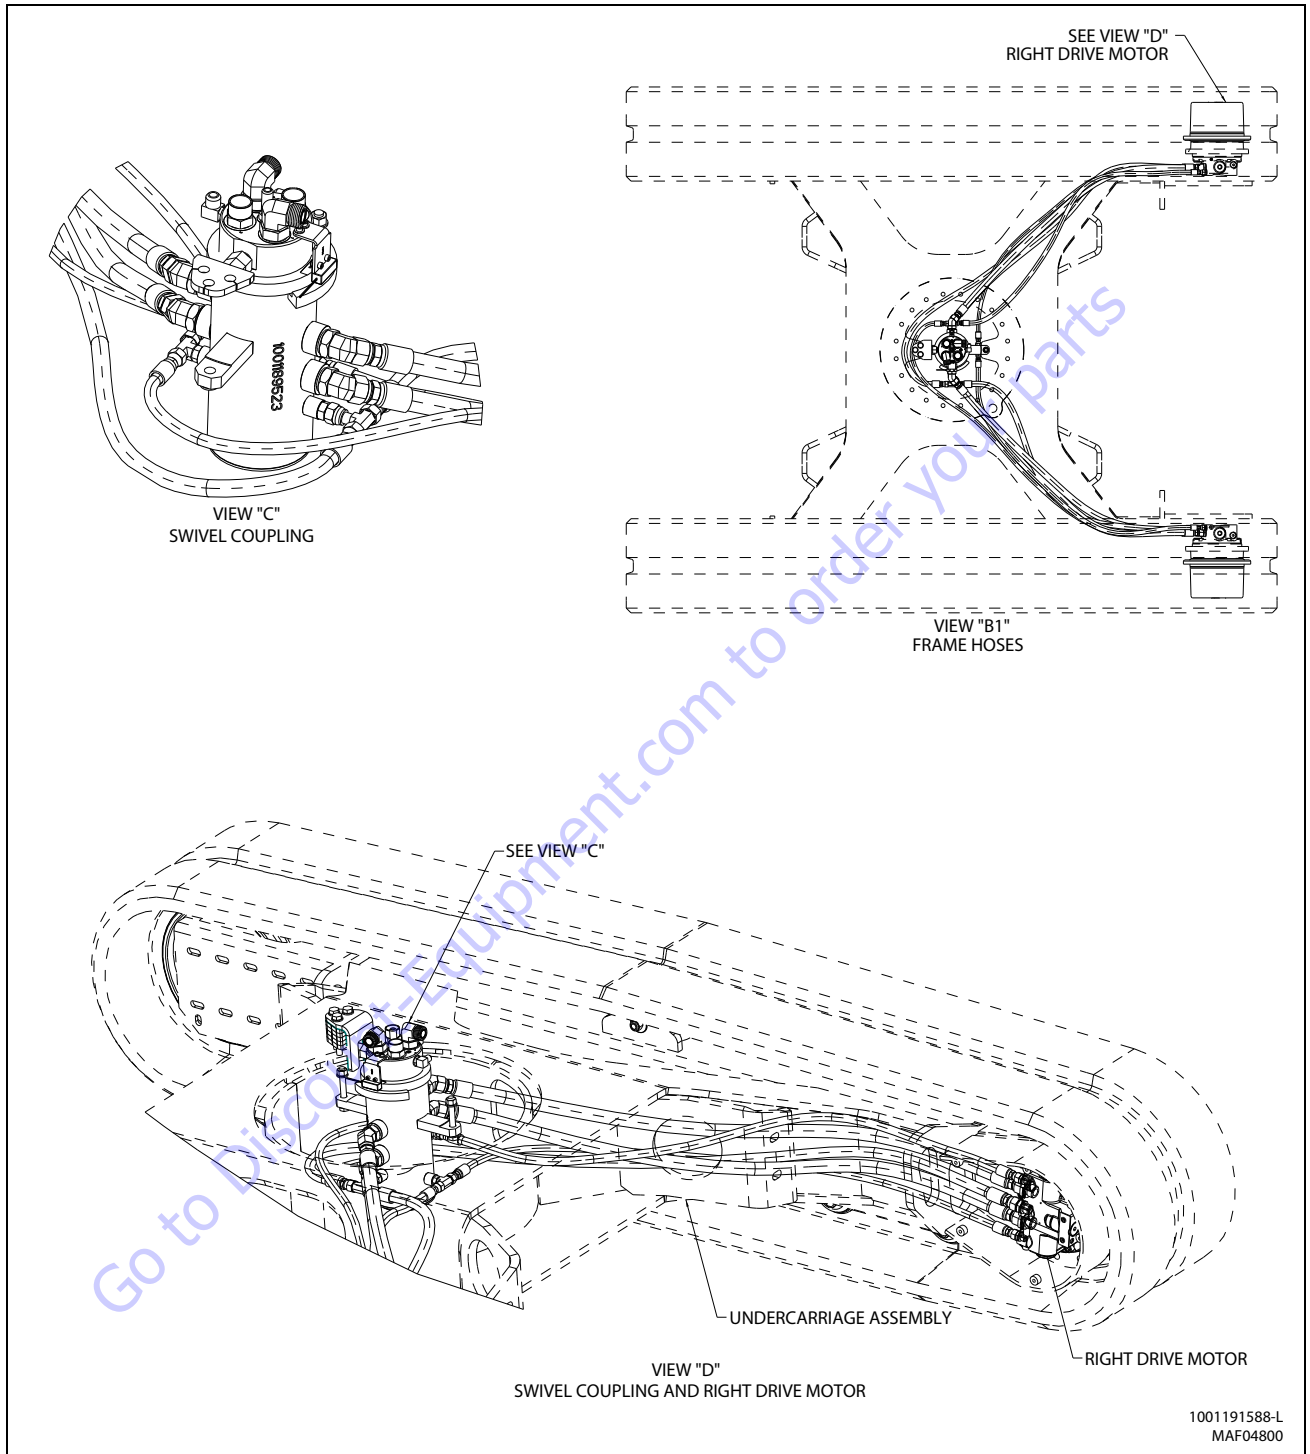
Hydraulic System Installation (400SC) - Sheet 6 of 16
